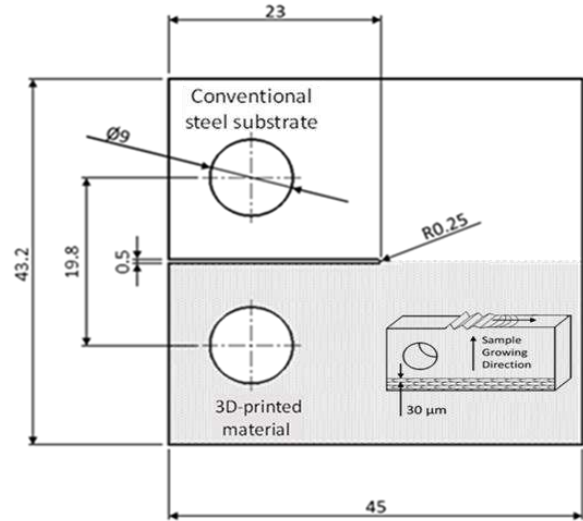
Specimen geometry (dimensions in mm) for fracture toughness tests.
